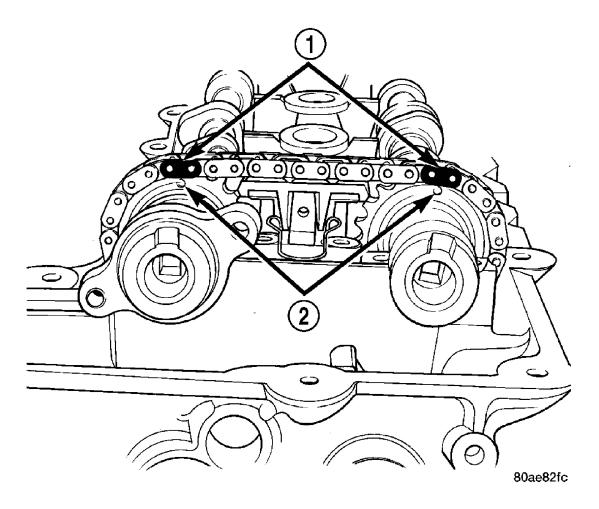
Identifying Camshaft Chain Timing Courtesy of CHRYSLER LLC
